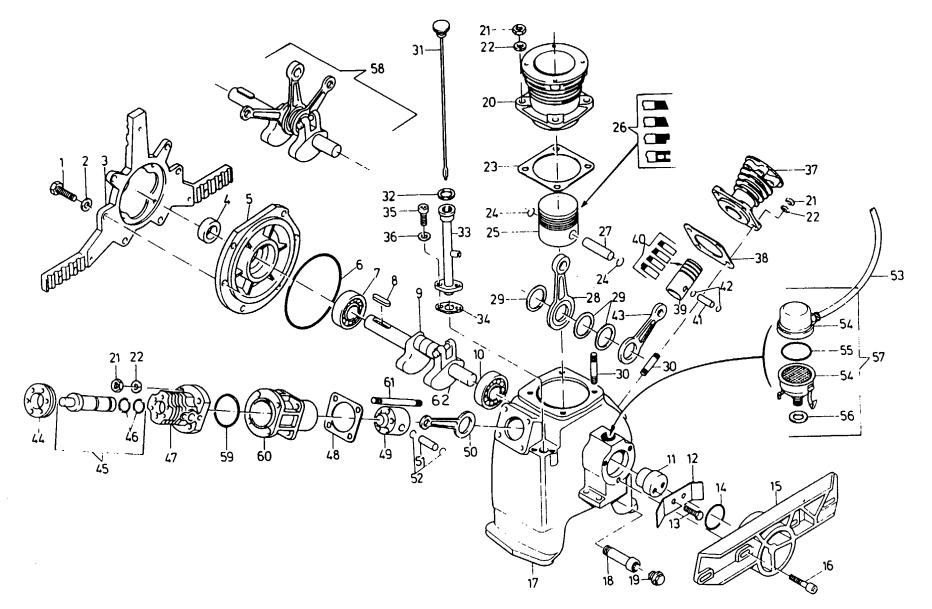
Compressor crankcase, crankshaft, piston, cylinders and accessories.
